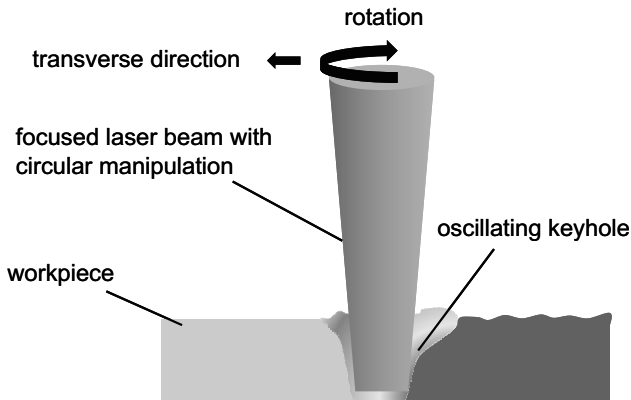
Schematic diagram of the laser stir welding (LSW) using circular beam manipulation [mod. acc. MARTUKANITZ 2005, p. 713]
